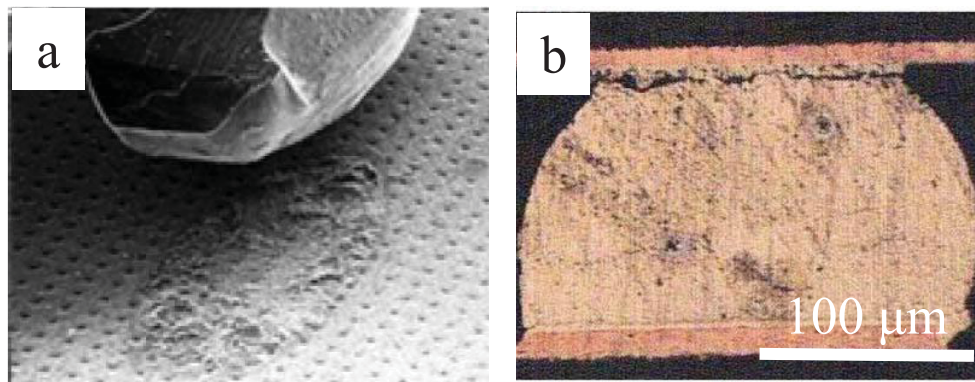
Typical thermal failures in electronic component: (a) Bond wire life off (SEM image, 40×) [11], (b) solder bond crack [12].
